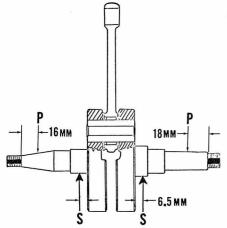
Crankshaft eccentricity is measured at points (P). Crankshaft should be supported at points (S).
